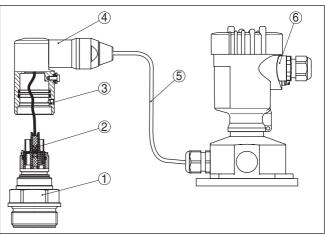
VEGABAR 82 in IP 68 version, 25 bar and lateral cable outlet, external housing
